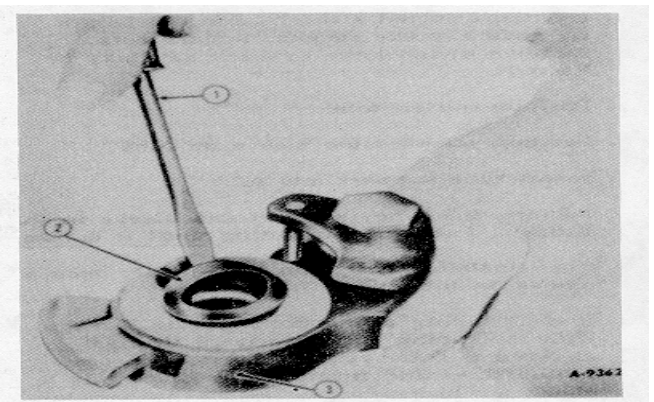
Using Screwdriver to Complete Packing Ring Installation
